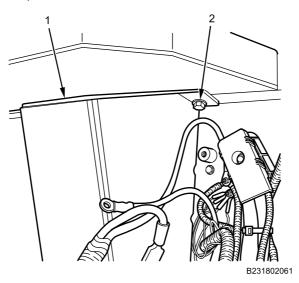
DCM Left Side Exterior Armor Upper Outboard Bolt.
